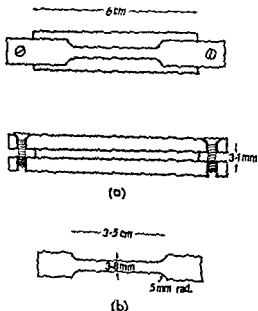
(a) Template production of tensile test piece (b) Dimensions of completed test piece
